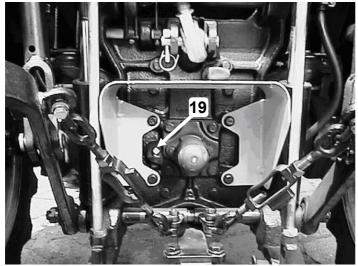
Oil filling plug of the rear drive axle 19 ( near the rear PTS)
